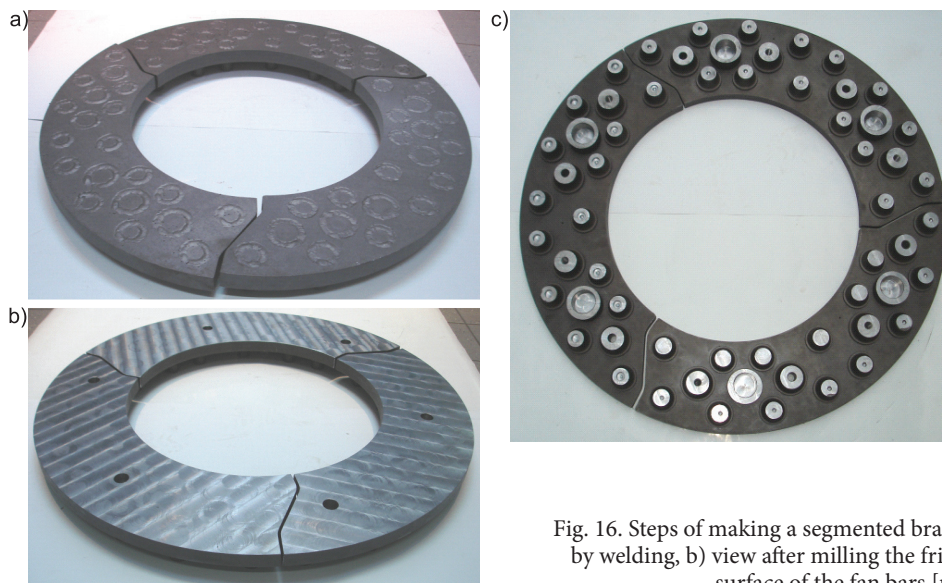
Steps of making a segmented brake disc: a) connecting disc with rods by welding, b) view after milling the friction surface to size, c) milling the surface of the fan bars [photo. W. Sawczuk]
